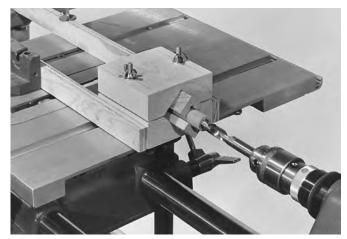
The extension V-block can also be used to grip short workpieces. Auxiliary V's are used when the stock's diameter is too small to be gripped by the basic V-block.
